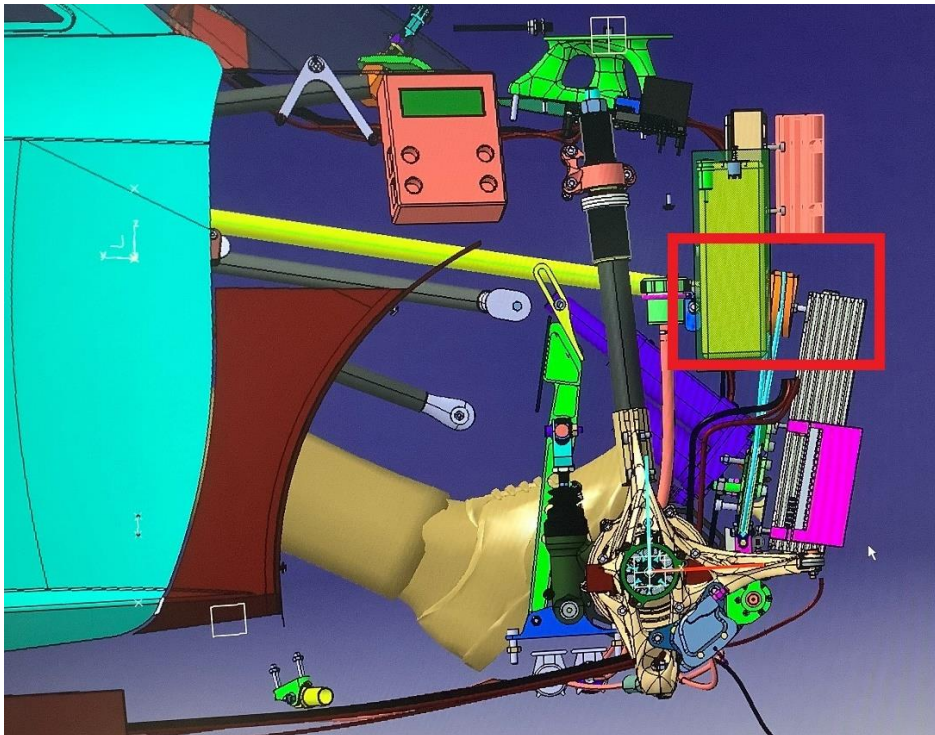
Disassembled front assembly. As can be seen in the red box, the primary pulley is completely immersed in the battery pack.
